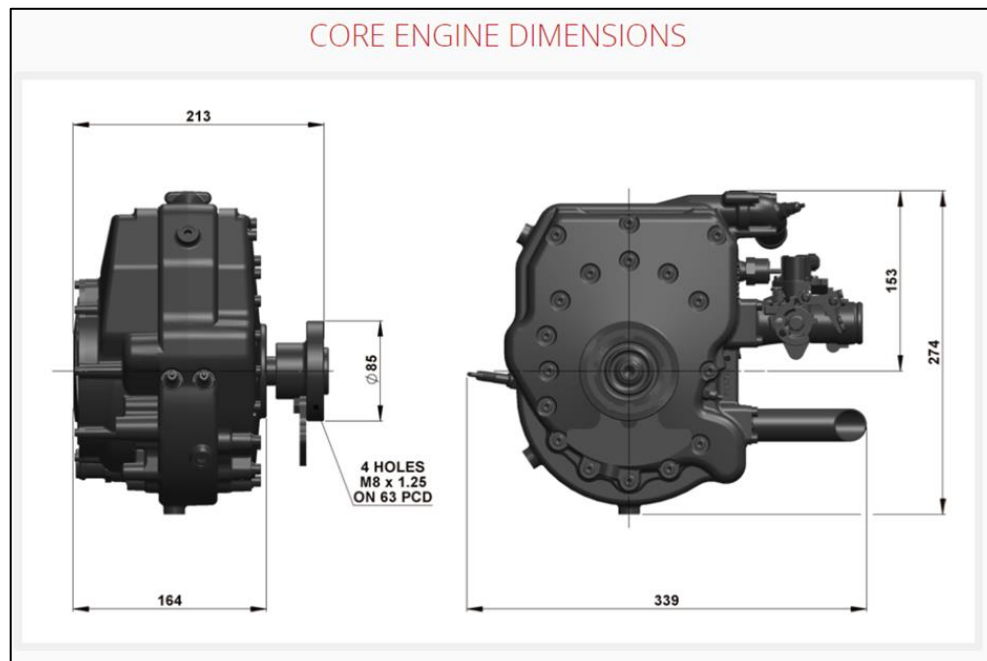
Core engine dimensions of the 225CS-017 rotary engine (Engineering)
